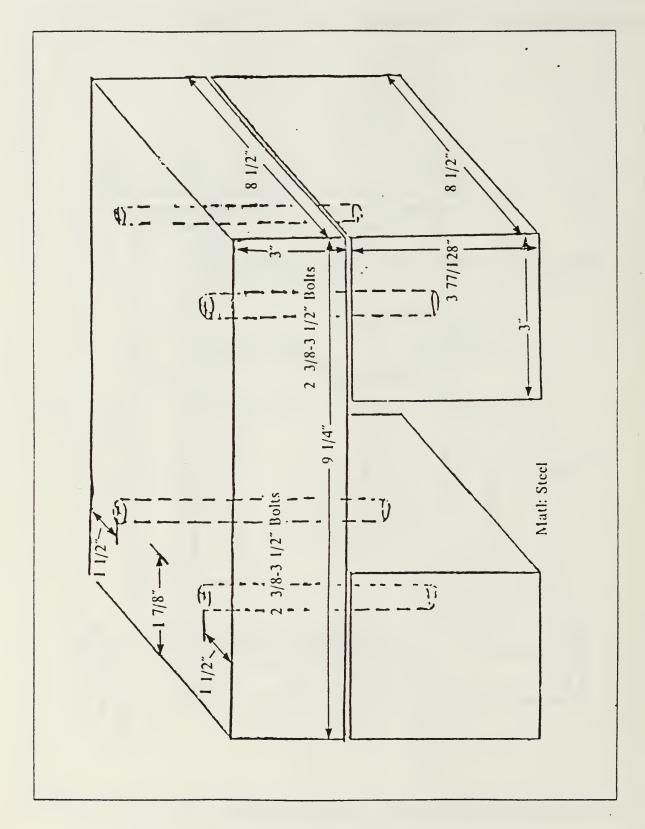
Electromagnetic Shaker Stand for Torsion Test
